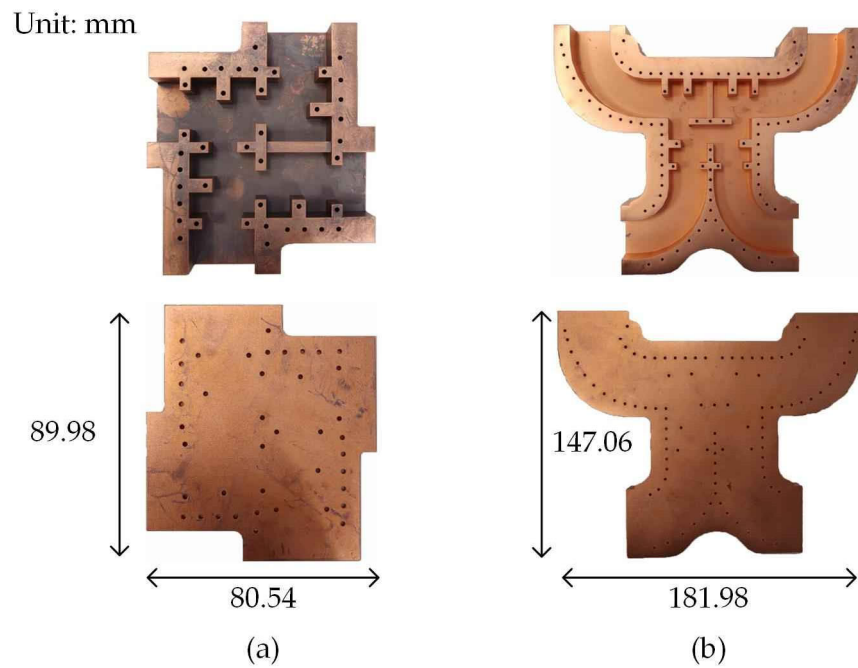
3D printed (a) Unmodified and (b) modified coupler, and their profile dimensions.
